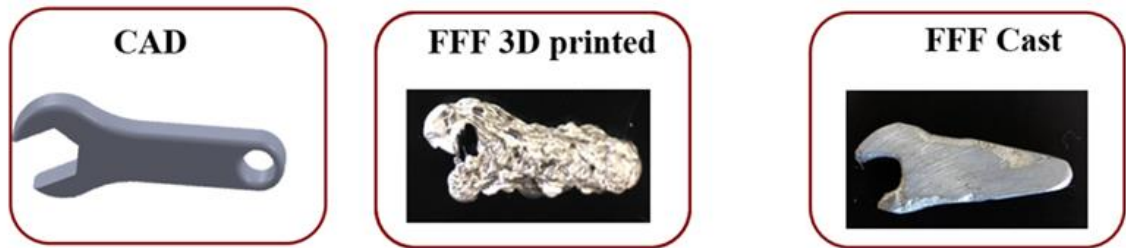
(a) SolidWorks design of the mechanical wrench (b) FFF 3D Printed wrench prototype (c) FFF 3D Cast wrench prototype
